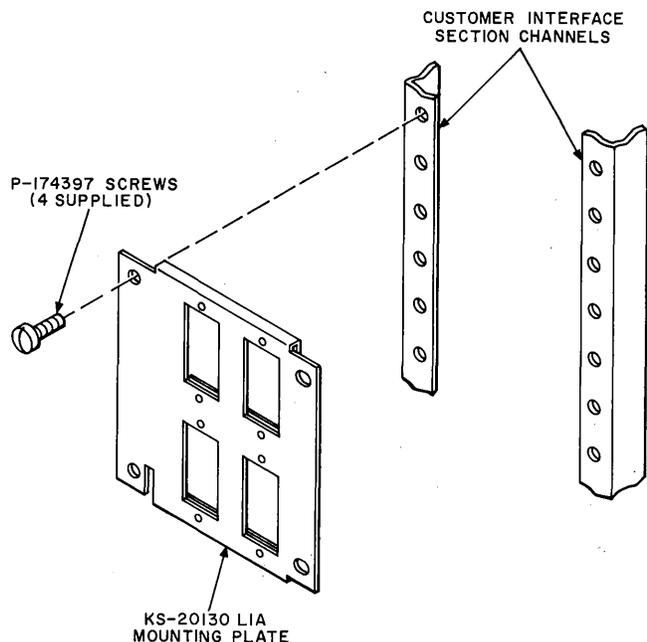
Detail for Mounting KS-20130 L1A Mounting Plate in Customer's Interface Section of KS-20093 L1 Cabinet
